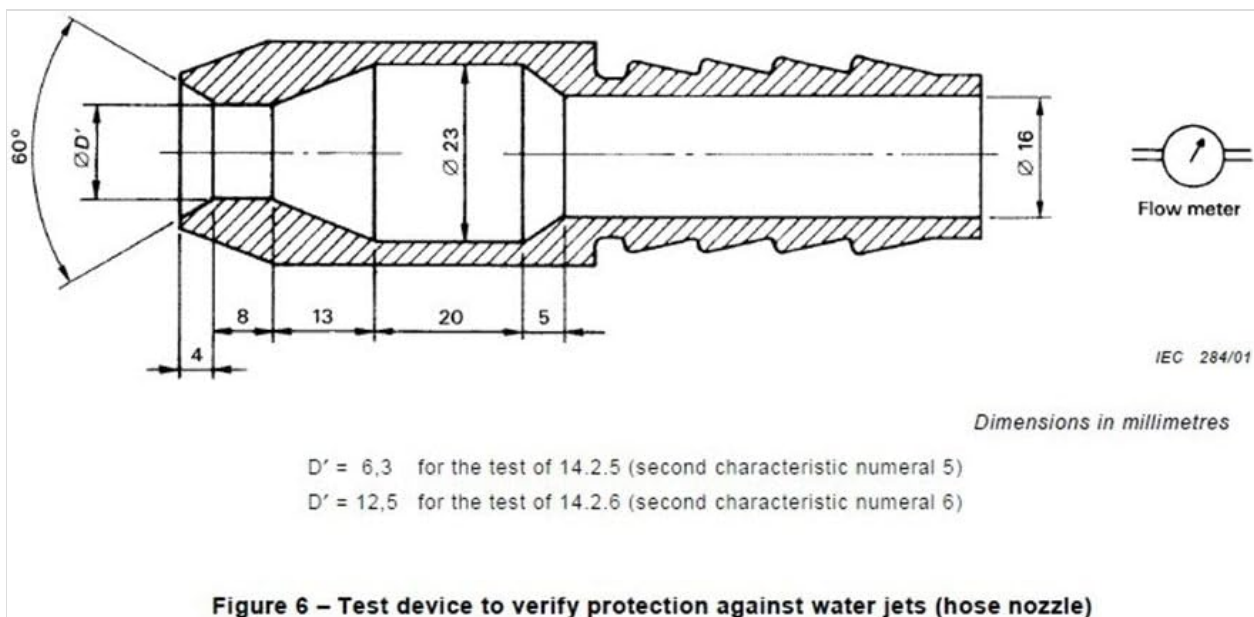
Technical drawing illustrating the dimensions of the test device, including the nozzle apertures for both IPX5 (D'=6.3) and IPX6 (D'=12.5) tests, all dimensions are in millimeters.
